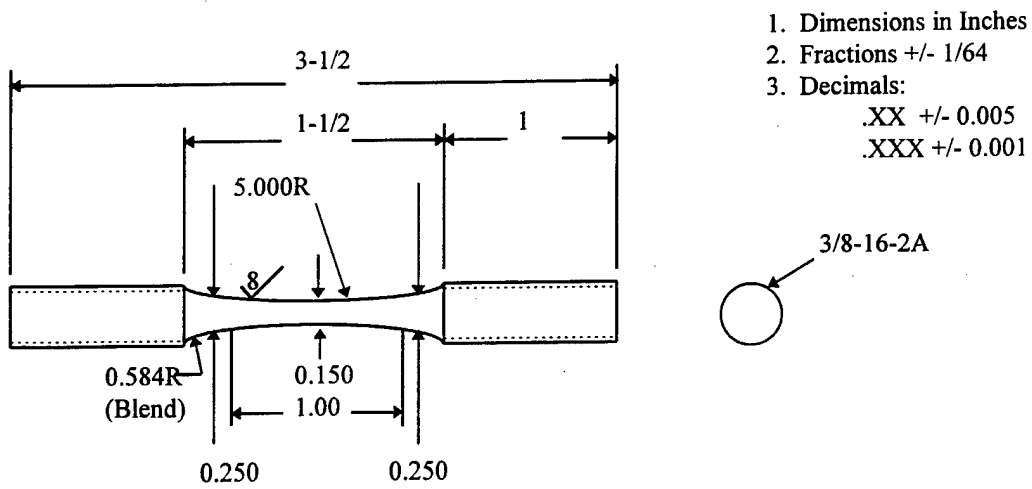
Schematic Illustrating the Dimensions of the Fatigue Specimens Tested by ARL-MD.
